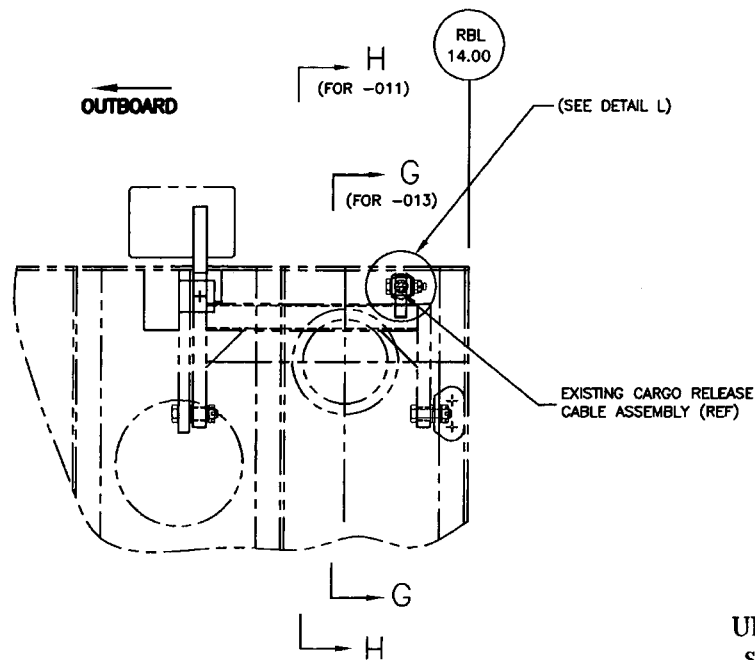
Detail B. View looking Aft (Pilot's Side)
